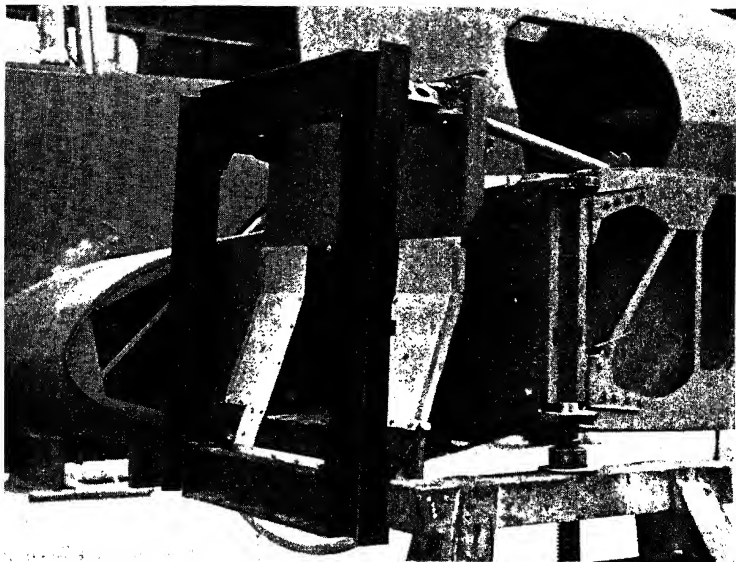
JIG IN USE FOR POSITIONING ENGINE MOUNTING ATTACHMENT FITTINGS.
